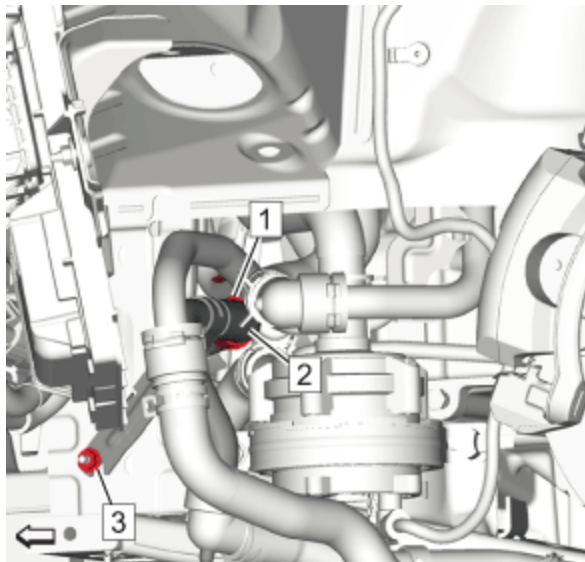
Drive Motor Control Module Radiator Outlet Hose Bracket Nut
